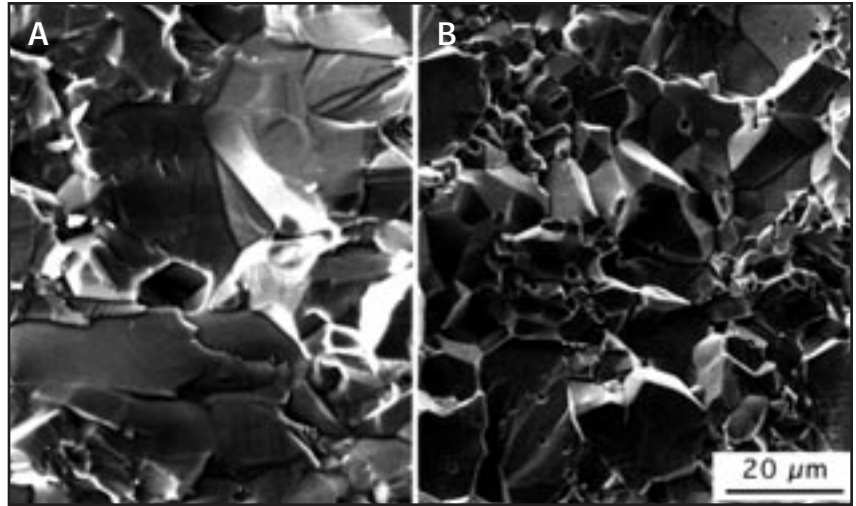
Fracture surfaces of brazed alumina tensile specimens that demonstrate a generally transgranular fracture mode in the 99.8%  $\text{Al}_2\text{O}_3$  (A, left) and intergranular fracture mode in the 94%  $\text{Al}_2\text{O}_3$  (B, right) specimens.
